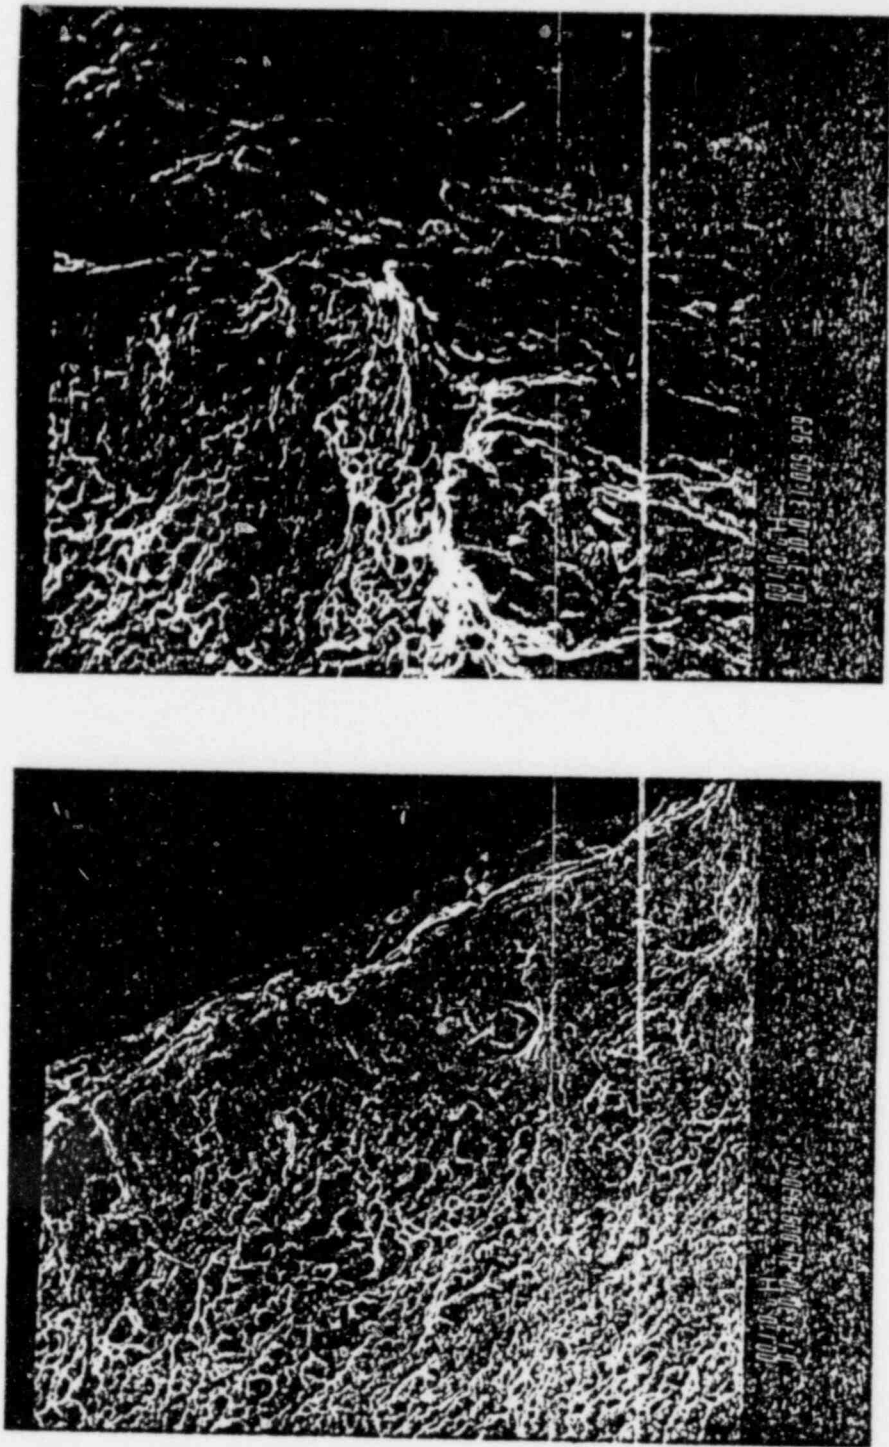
Typical Appearance of Inconel X750 Spring Fracture Surface (1000X)
